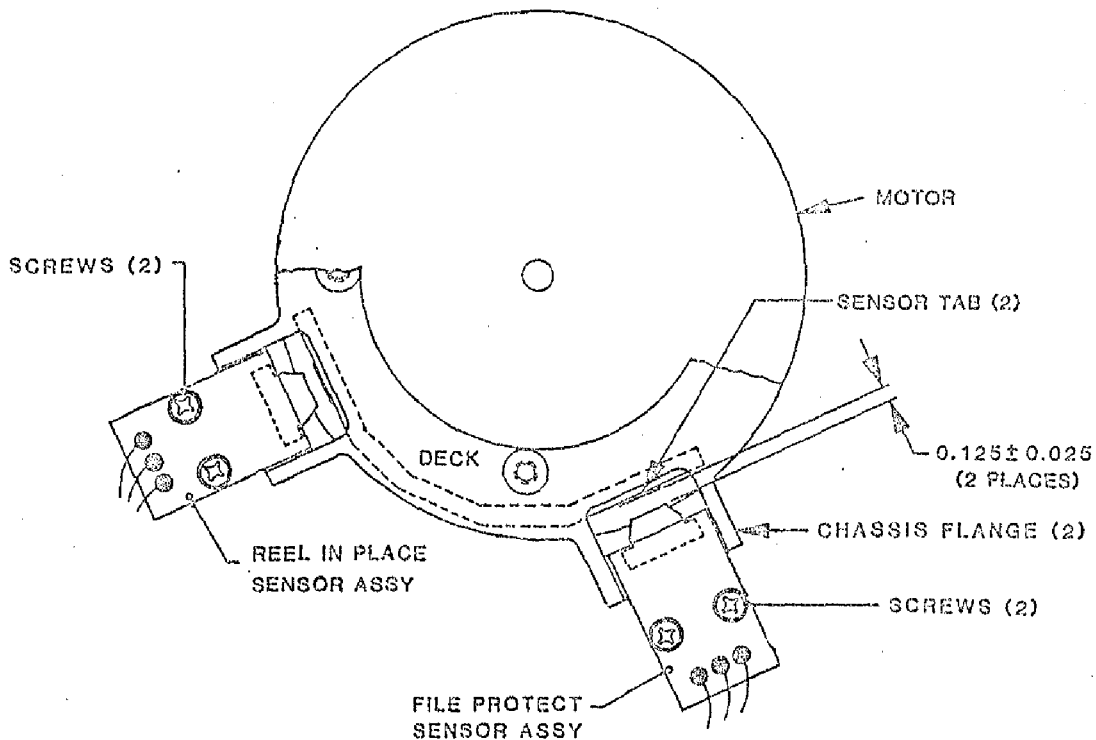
File-Protect and Reel-In-Place Sensor Assemblies (Bottom View)
